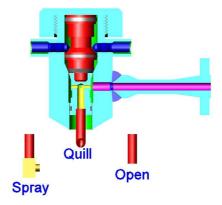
Injection tubes: Open tube, Quill tube and Spray tube.
